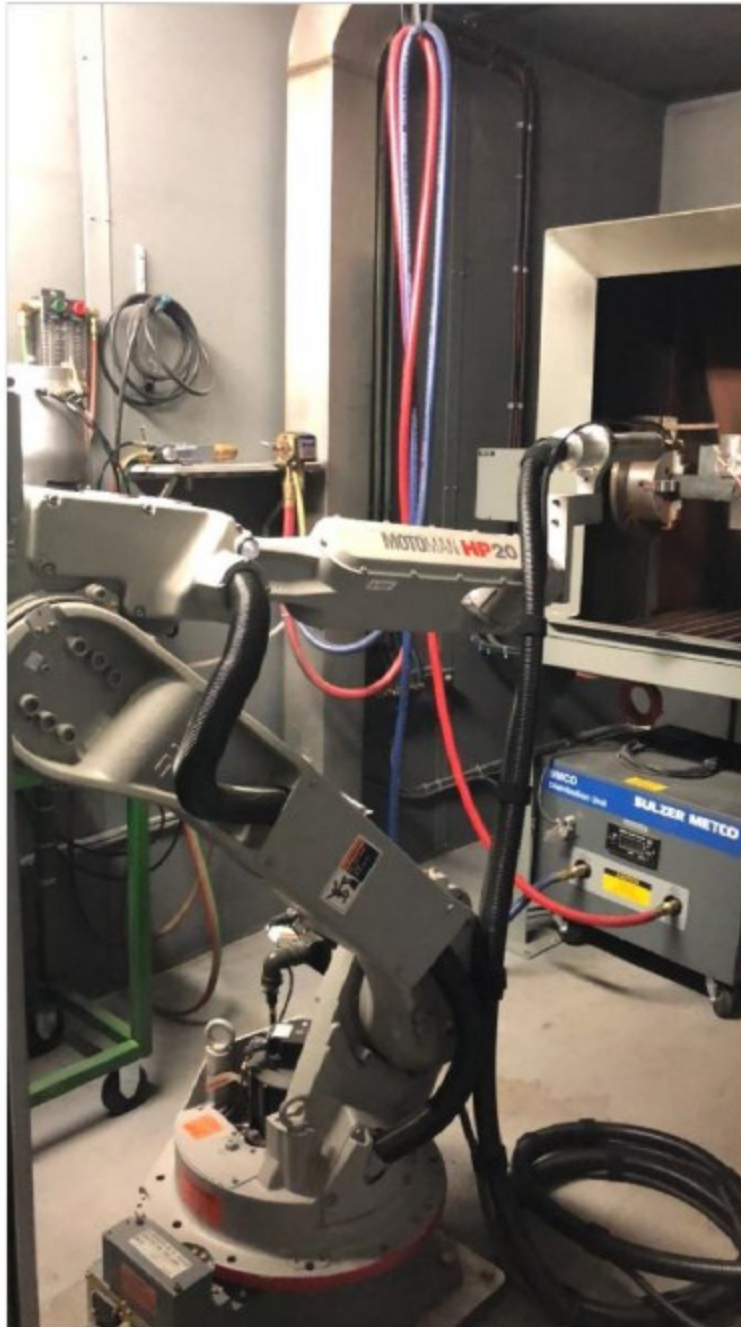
The cold spray gun mounted on the HP-20 Motoman robot [44].
